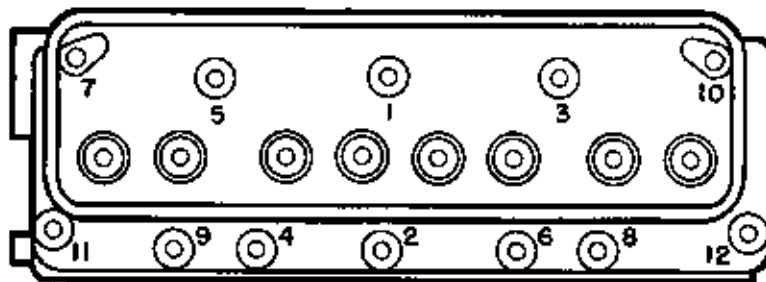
Cylinder head hold down screws should be tightened in this numbered order.
